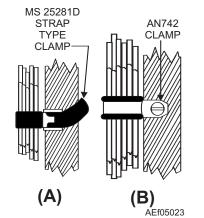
(A) Strap type cable clamp and (B) AN 742 cable clamp.
